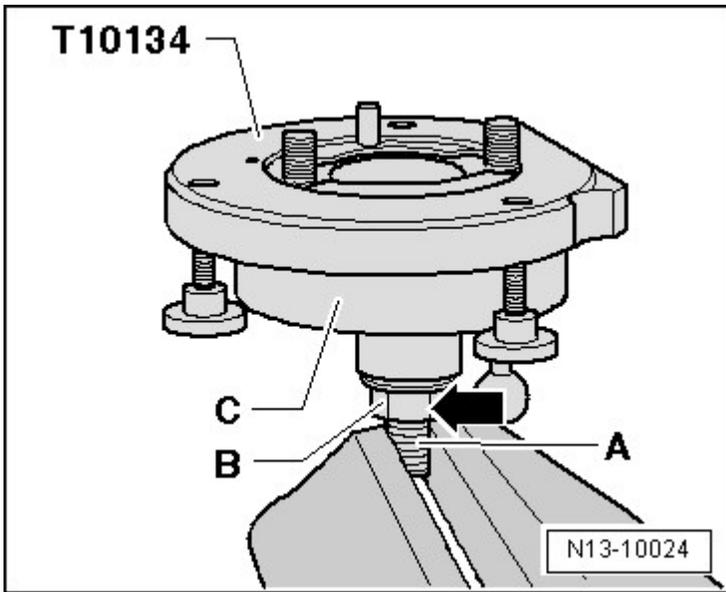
Identifying Assembly Tool T10134 Tensioned In Vise On Tension Surface Of Threaded Spindle
